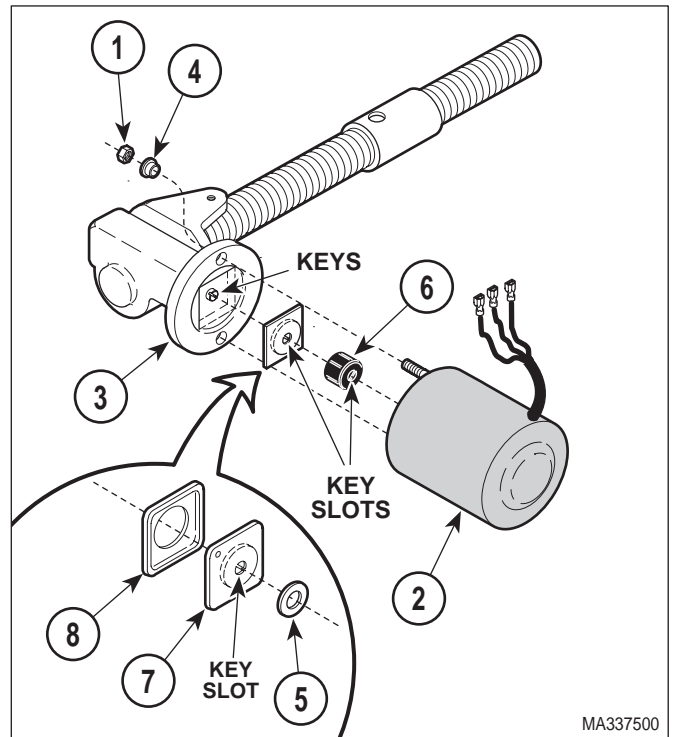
Actuator Motor / Actuator Brake Removal / Installation
